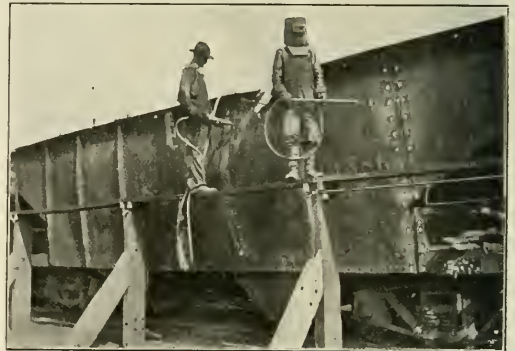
After the Rivet Heads Are Burned Off the Rivets Are Backed Out With a Pneumatic Tool
